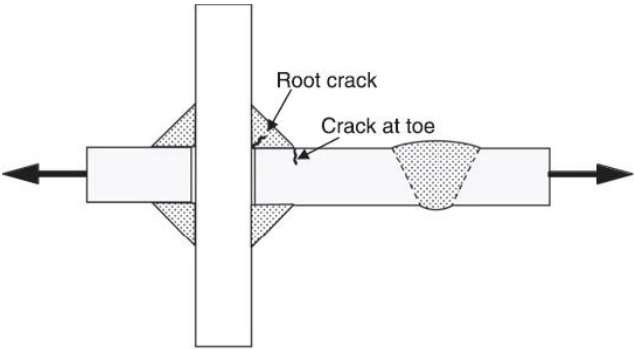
1- 6 Cruciform welded joint loaded in tension [8].
